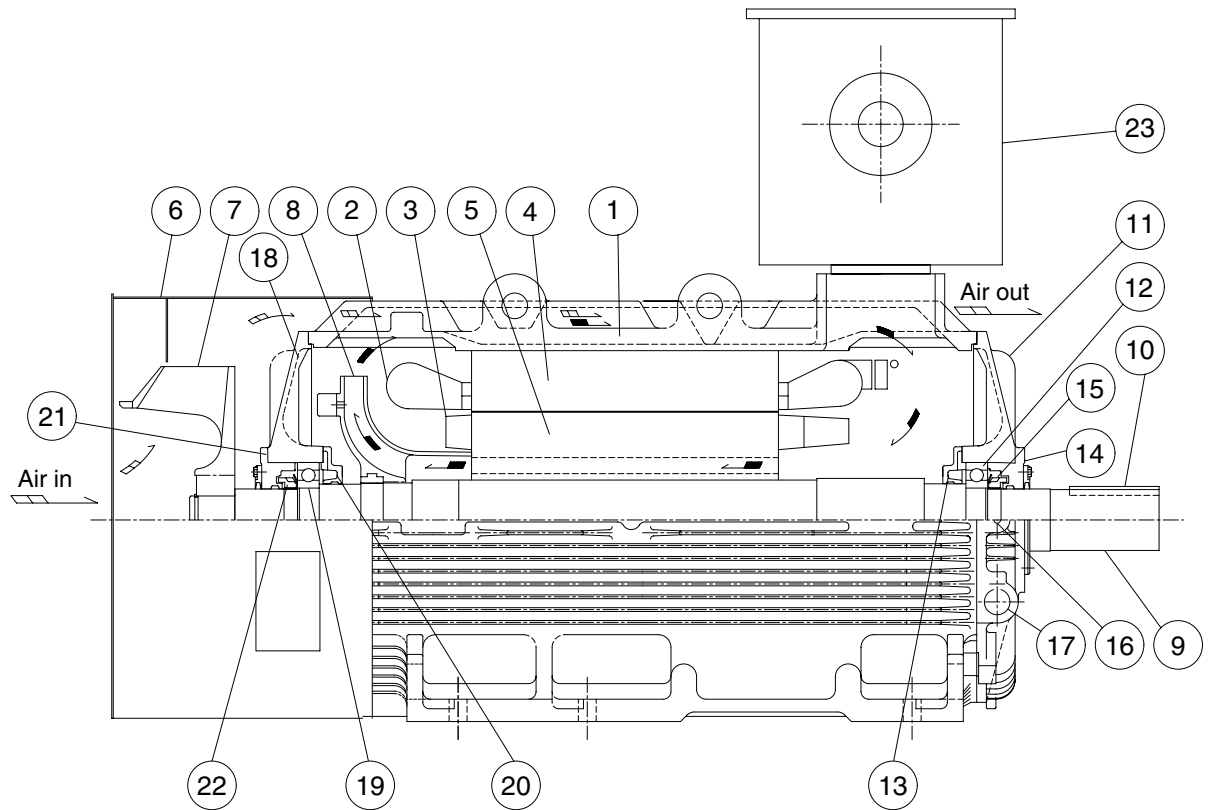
Section Drawing of Horizontal foot mount (Frame size 315H~450)
